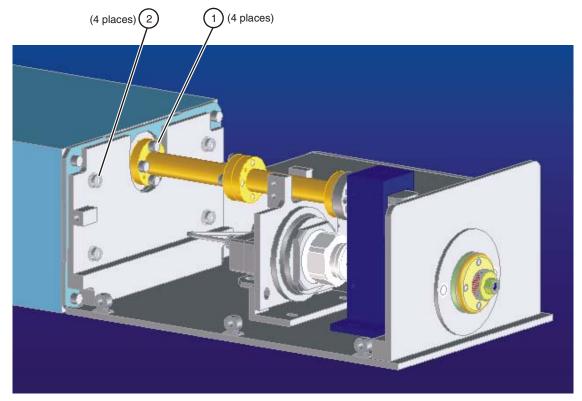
New Design Combiner Assembly and mm-Wave Module: View 2
